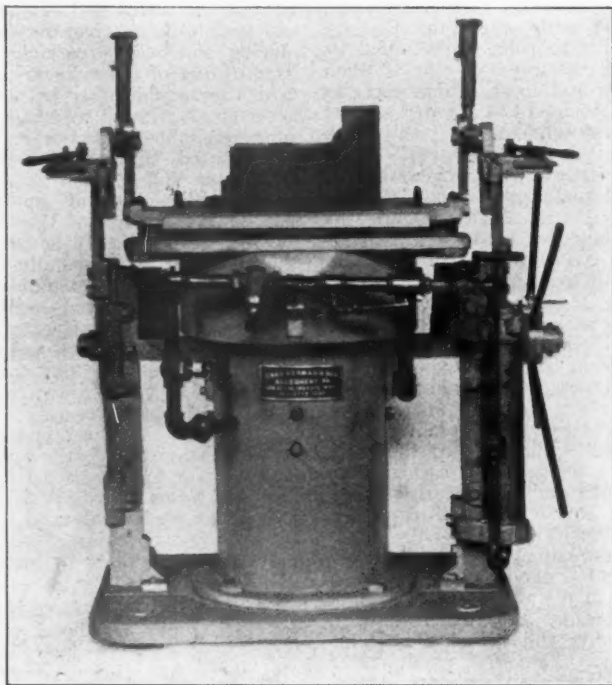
FRONT VIEW OF MOLDING MACHINE WITH MOLDING BOARD AND PATTERN IN PLACE.
